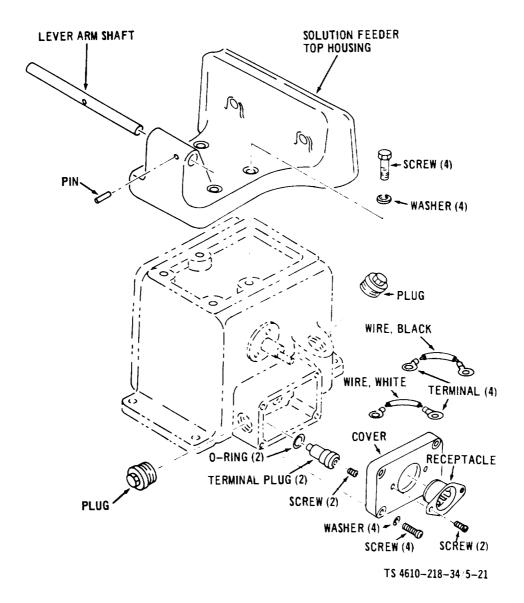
Chemical Solution Feeder Junction Box Cover Receptacle, Top Housing and Lever Arm Shaft, Disassembly and Reassembly
